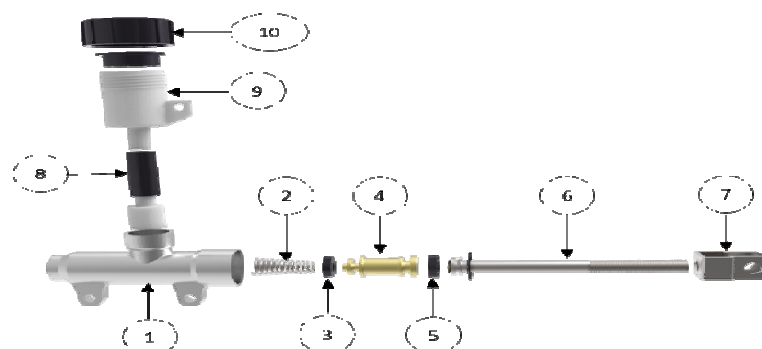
Exploded View of a Master Cylinder (CAD Model).
